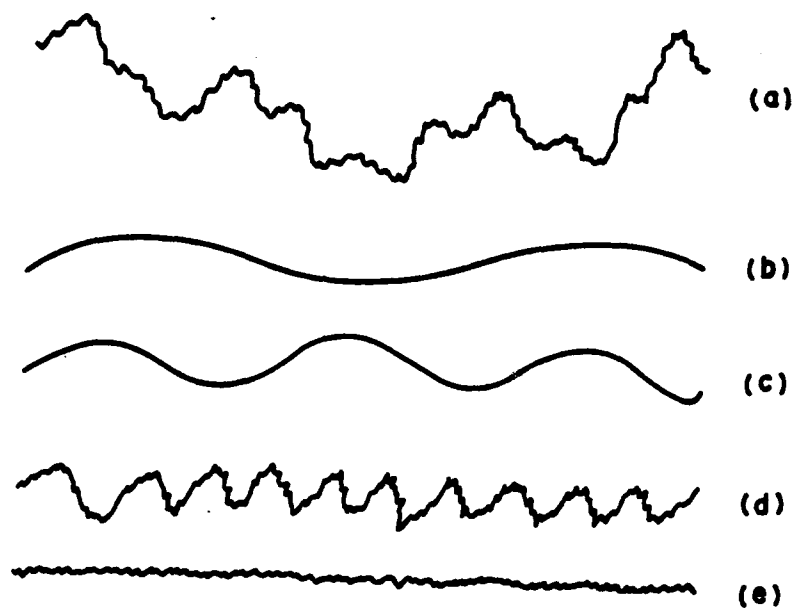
Constituents of the topography of a machined surface; (a) general topography which includes the irregularities caused by (b) flexure or slideways, (c) vibration or bad truing, (d) the cutting tool, and (e) chip removal (Ref. 30).
